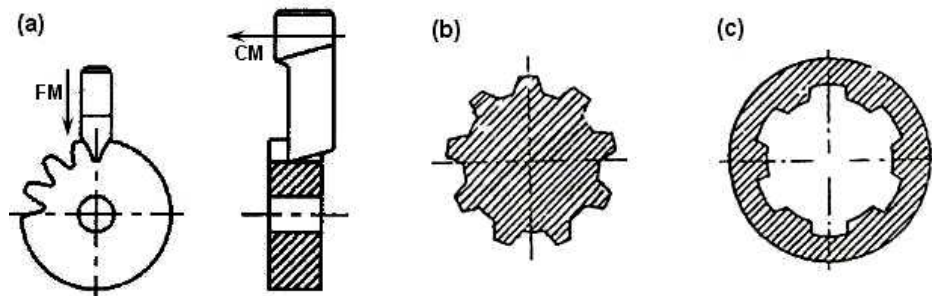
Machining of (a) External gear (b) External splines and (c) Internal splines in a shaper
